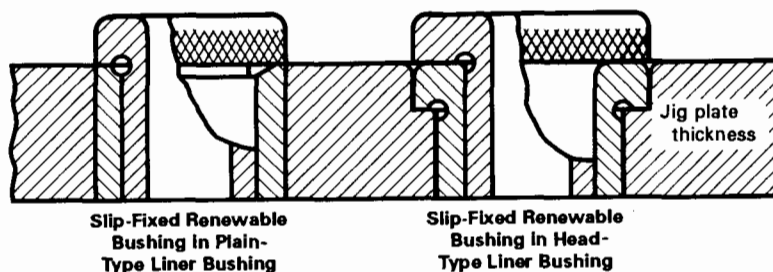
PLAIN-TYPE AND HEAD-TYPE LINER BUSHINGS
